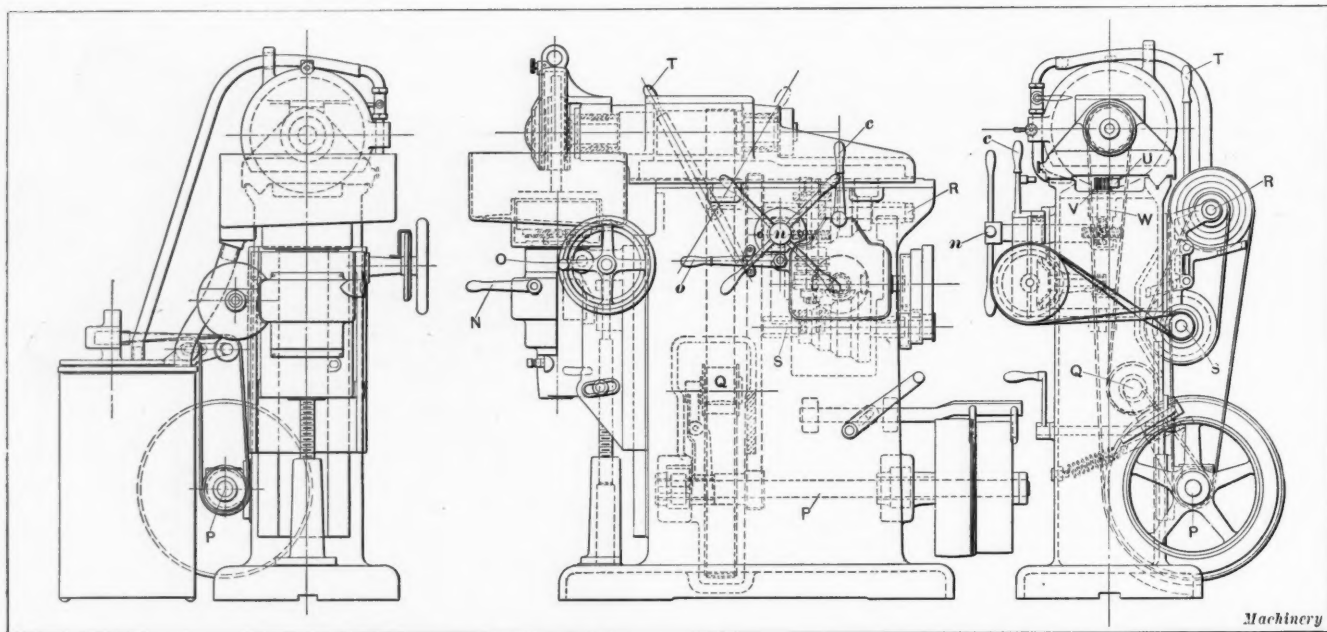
Front, Rear and Side Views of Persons-Arter "Model A" Rotary Surface Grinder
